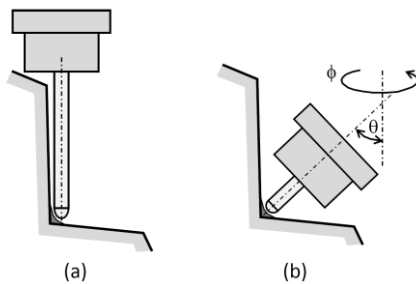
3-axis milling (a) and 3+2 axis milling (b) for removing material in a corner.
